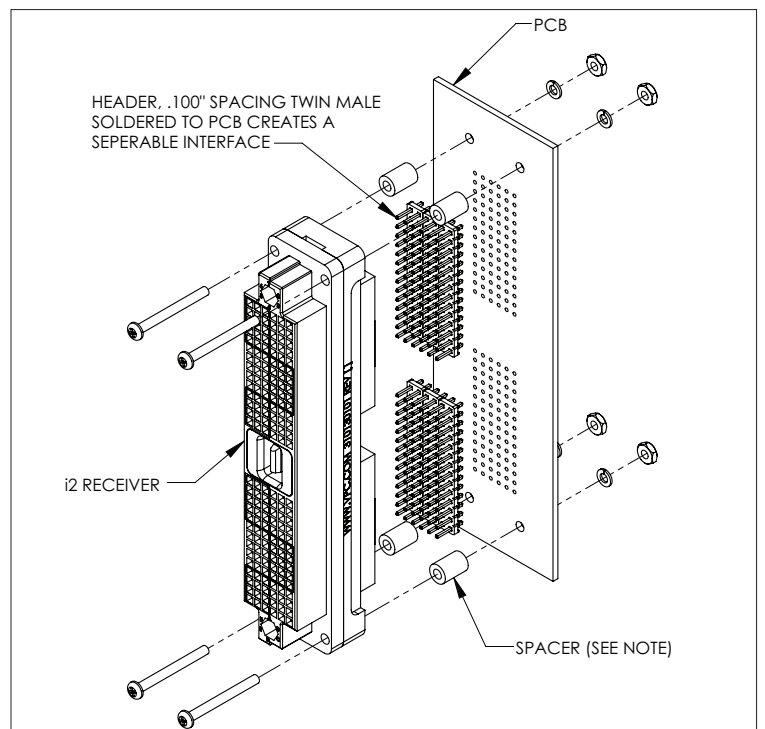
Figure D. A PCB can be mounted directly to the back of an i2 receiver as shown above. Four 2-56 or M2 screws are required to mount the receiver. Spacers may be needed to prevent unwanted stress on the PCB.
